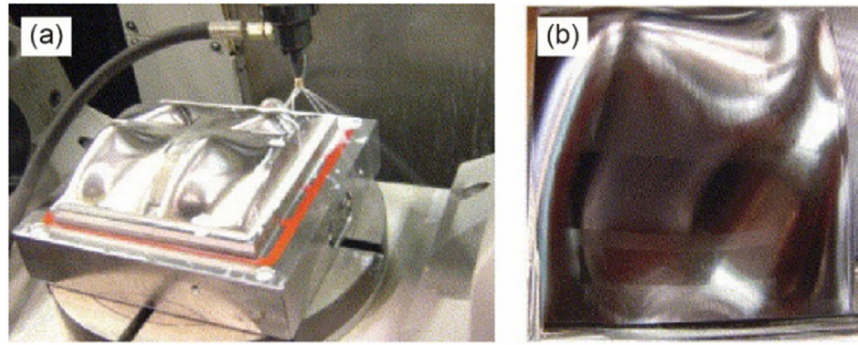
Ball burnishing of a mold made of H13 tempered steel: (a) details of the burnishing setup, (b) one of the burnished surfaces [144].
